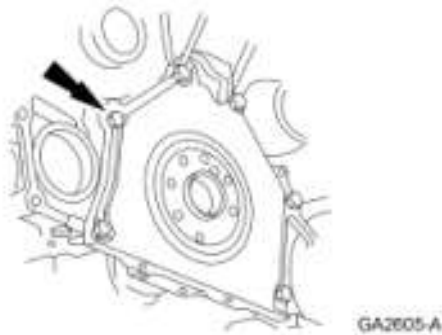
Locating Crankshaft Rear Seal Retainer Plate Bolts
